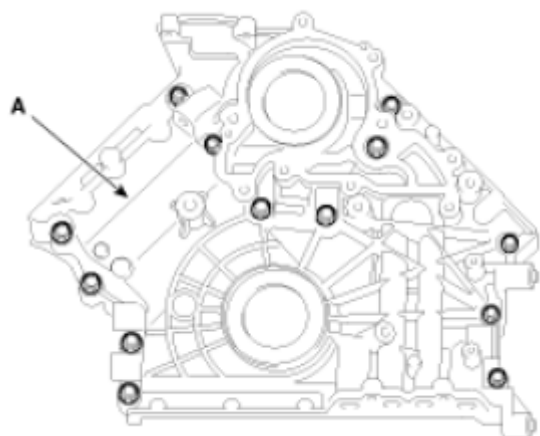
Identifying Timing Chain Lower Cover (Front)
